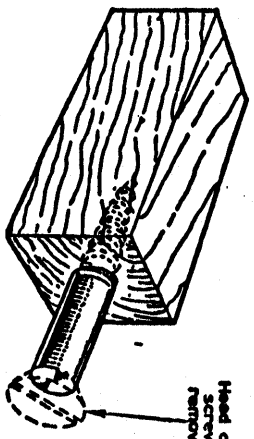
A suitable bobbin holder for use with a geared brace for winding.
